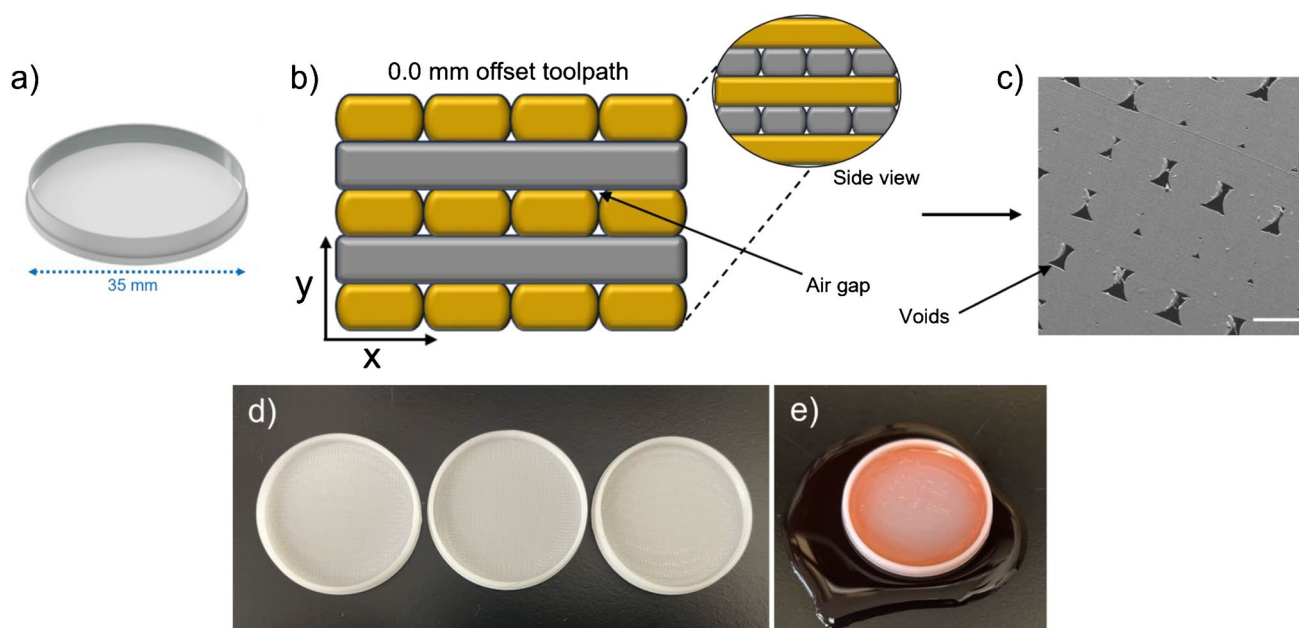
Initial 3D-printed static devices using Stratasys FDM printing approach. a CAD rendering of FDM 3D-printed culture dish, based on dimensions of a 35-mm petri dish. b Illustration of regular toolpath with air gap 0.0 mm for standard printing. c SEM micrograph
